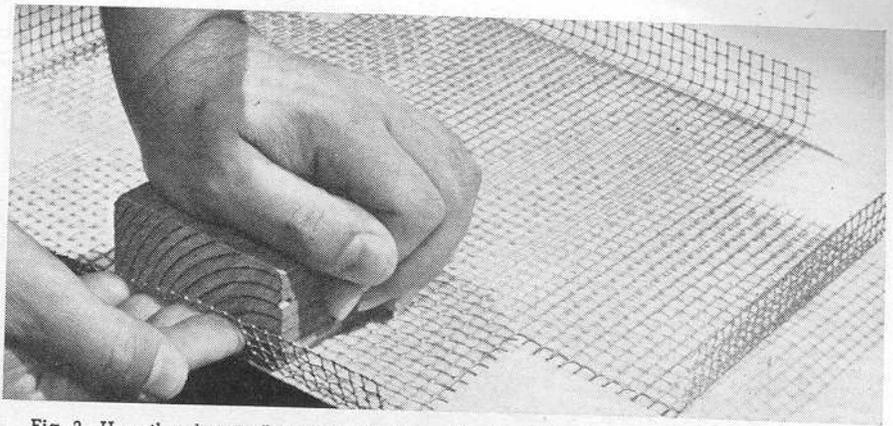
How the chassis flange can be formed by hand by bending the material against a wooden block. If unusually heavy components are to be mounted on a "basket chassis" stiffeners, in the form of additional pieces of the hardware cloth, may be fixed to the chassis by working the wire stubs into the chassis surface. These structures could also be used to form shielded compartments within the chassis proper.
